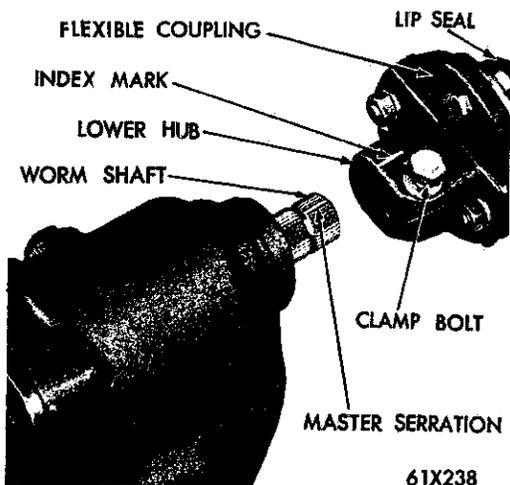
Aligning the Steering Gear with the Flexible Coupling
